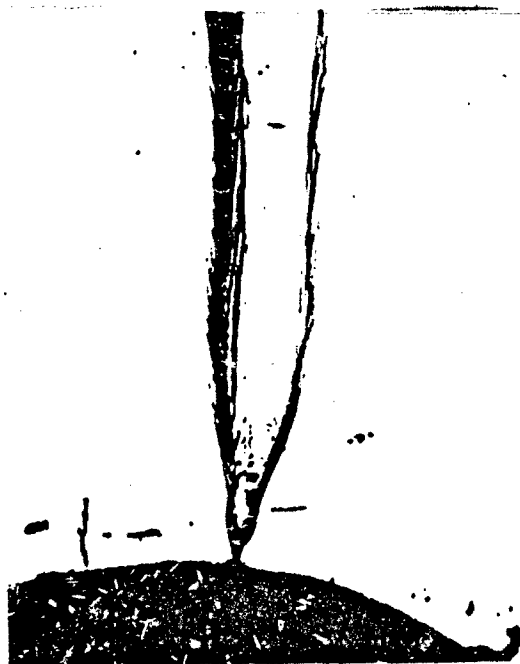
Crack at tensile zone of the specimen with 1/4" Dia hole, 20X. Crack is started from the hole edge. Craze spot is located ahead of the crack tip. 163000 cycles.
